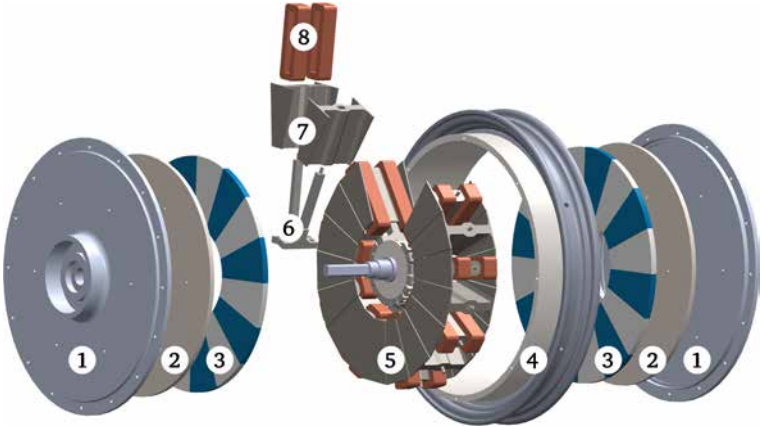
The exploded view of the revised assembly of SAT PMBLDC motor(1. End cover, 2. rotor yoke, 3. magnet poles, 4. wheel rim with spacer, 5. stator, 6. tooth holder, 7. segmented tooth, and 8. coils).
